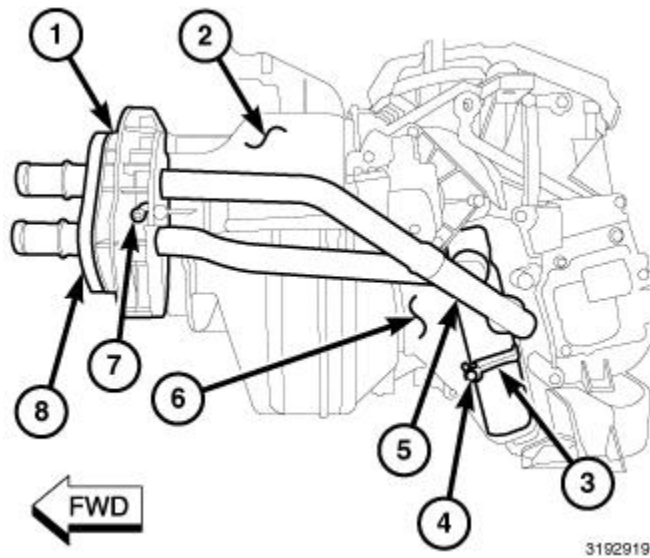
Screw, Flange, HVAC Housing, Retaining Screw, Bracket & Housing
